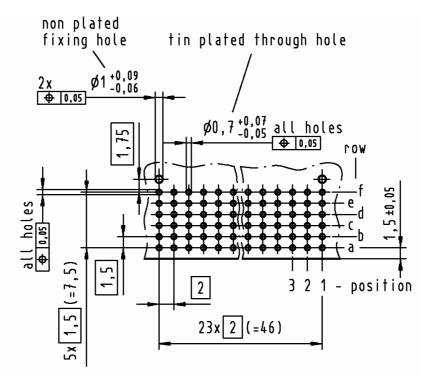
Board Layout For 144 Pin Female PIHR Connector Without Guidance
